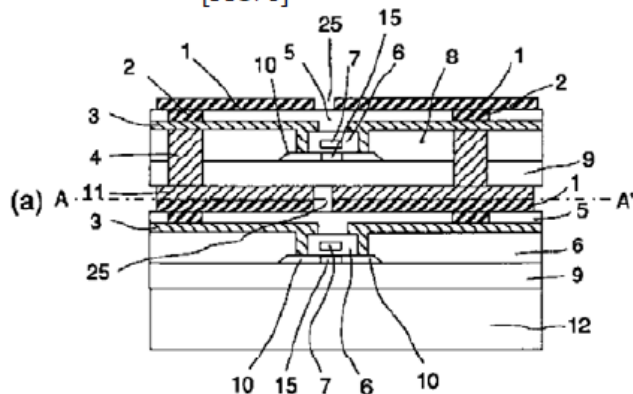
(reproduced below) is a cross sectional view showing an example of embodiment in which two layers of LSIs were laminated.
